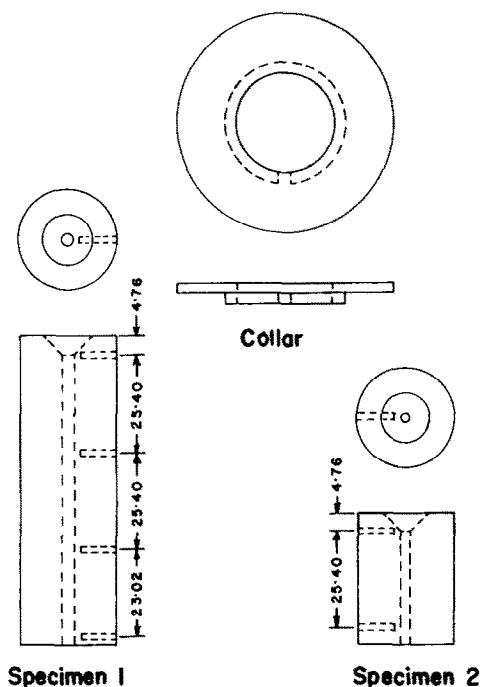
Drawing of specimen 1, specimen 2, and a collar, showing location of thermocouple holes (dimensions in mm).
